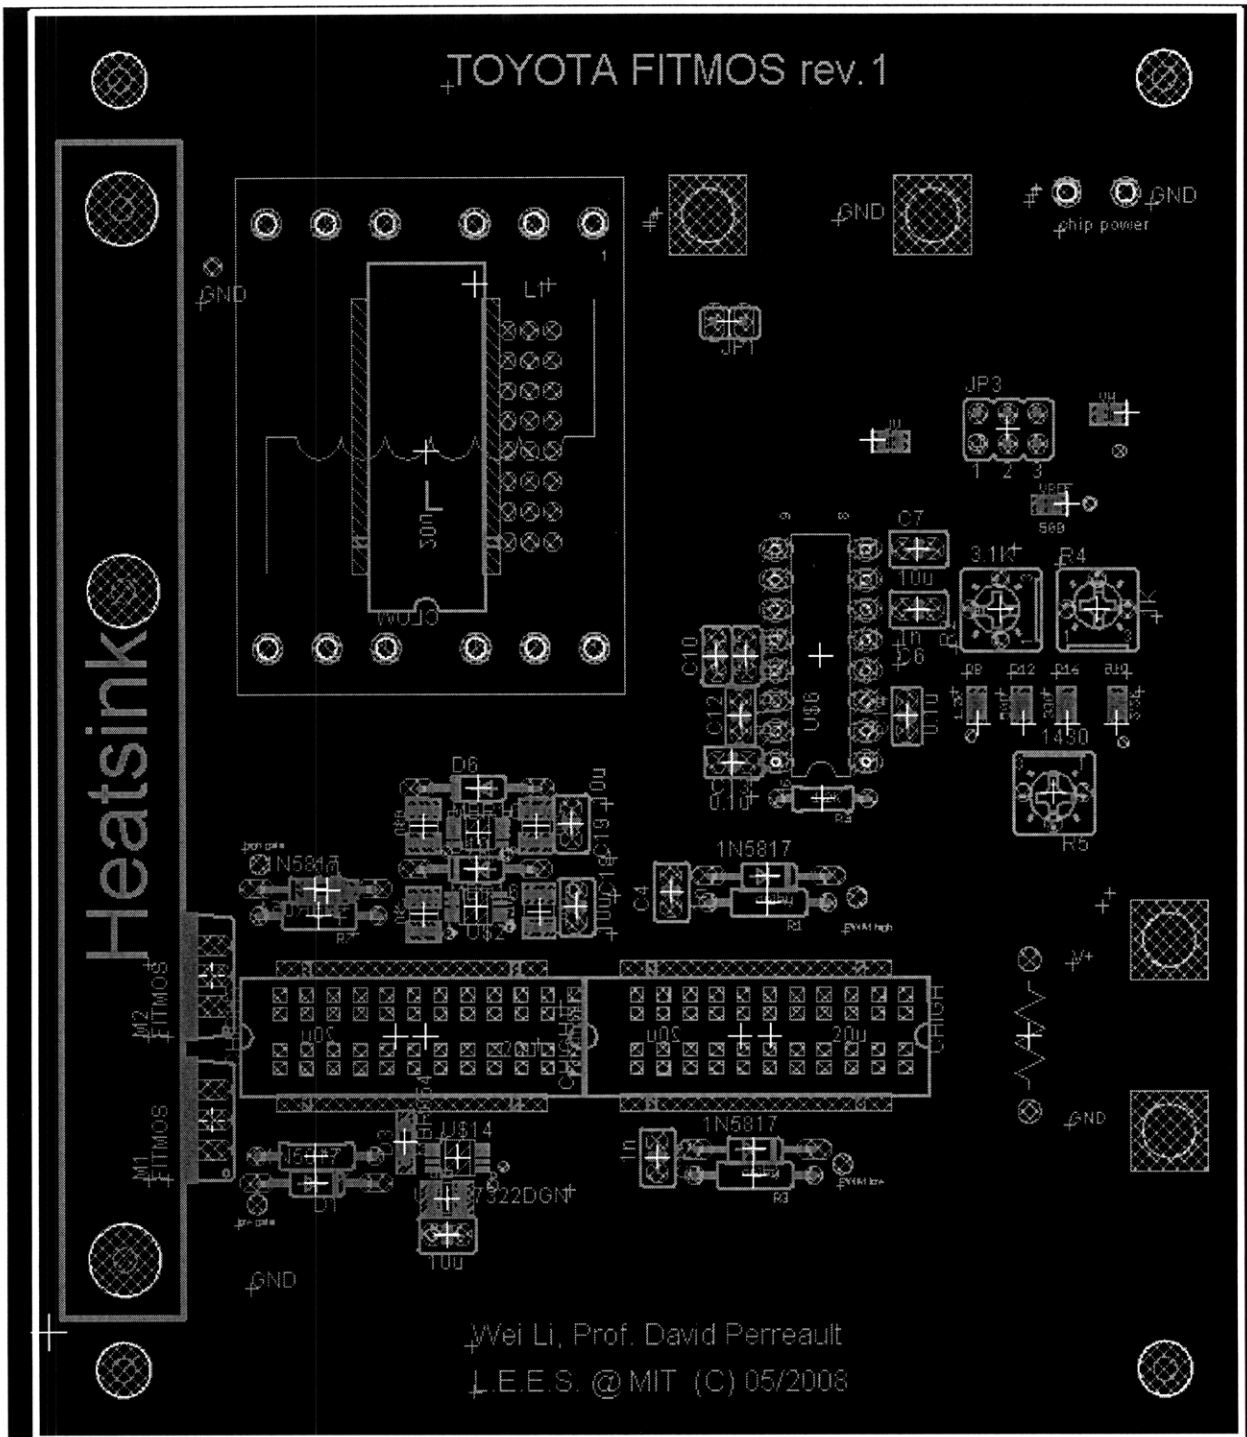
The second layer PCB layout drawn in EAGLE
